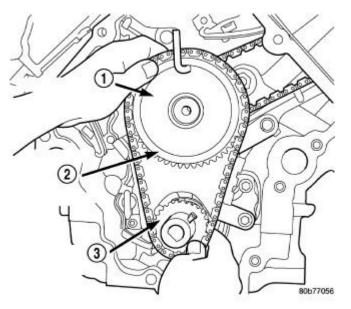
INSTALLING IDLER GEAR, PRIMARY AND SECONDARY TIMING CHAINS Courtesy of CHRYSLER LLC
